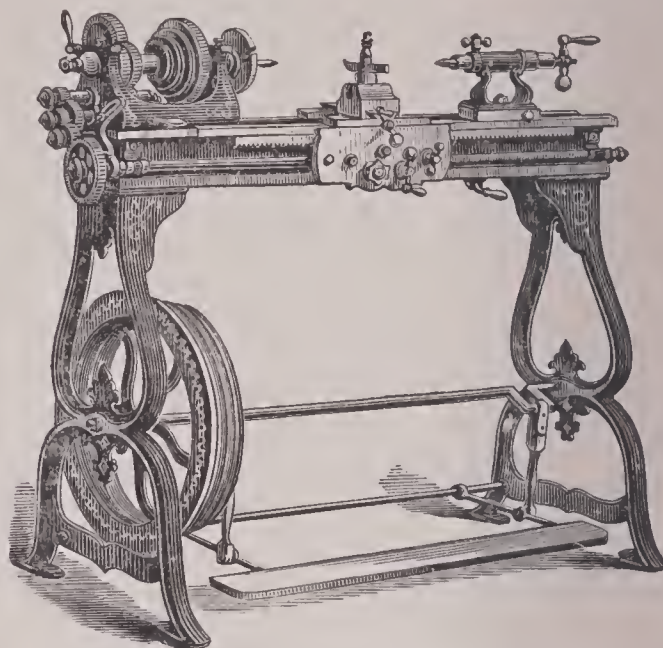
Screw-cutting engine-lathe, with foot-motion.
